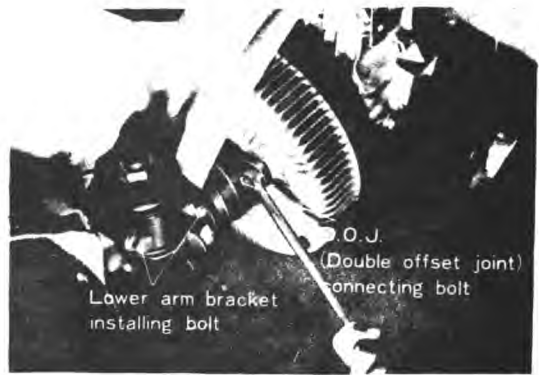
Removal of D.O.J connecting bolt and lower arm bracket installing bolts
